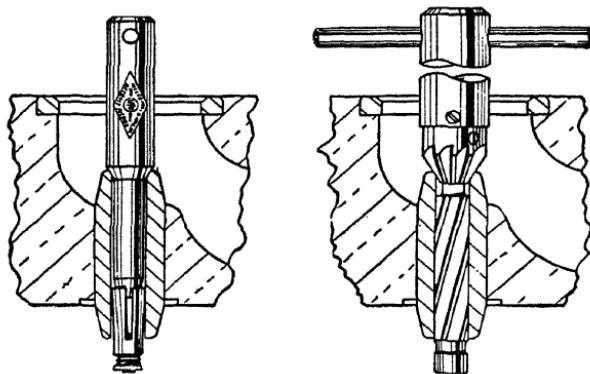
Cleaning Valve Guide and Chamfering the Guide
